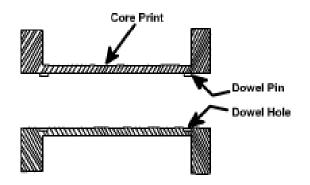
(b): The Split Piece or Two Piece Pattern of a Cast Iron Wheel
